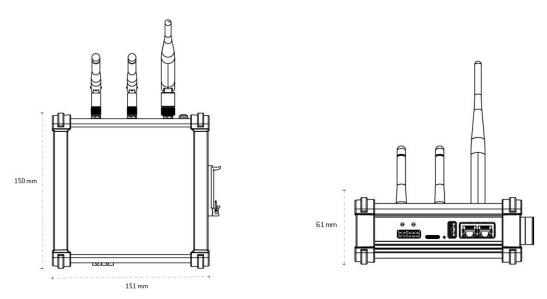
Dimensions of the Universal IoT Gateway with aluminum case.
